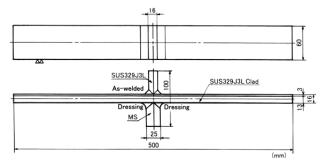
Shape of fatigue test specimen (non-load-carrying full-penetration cruciform welded joint)
